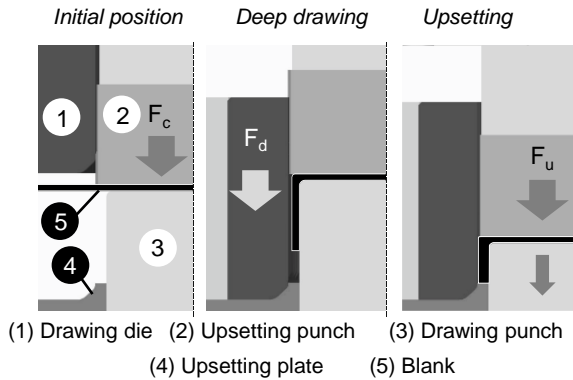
Kinematic of the combined deep drawing and upsetting process
